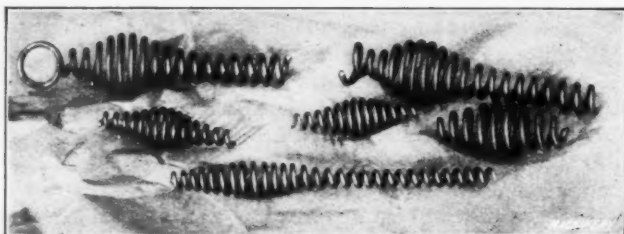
Types of Irregular-shaped Springs wound on Arbors in the Lathe
